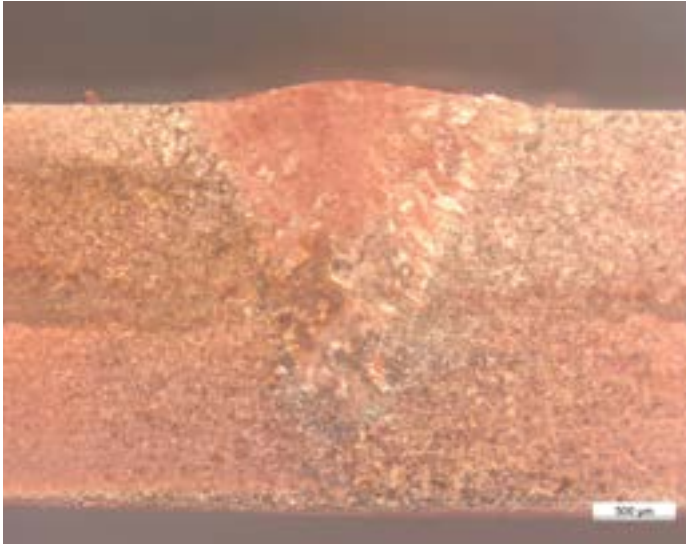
Overlap welding of 1.2 × 1.2 mm thickness (copper sheet) by a 3 kW blue diode laser. ©Laserline
